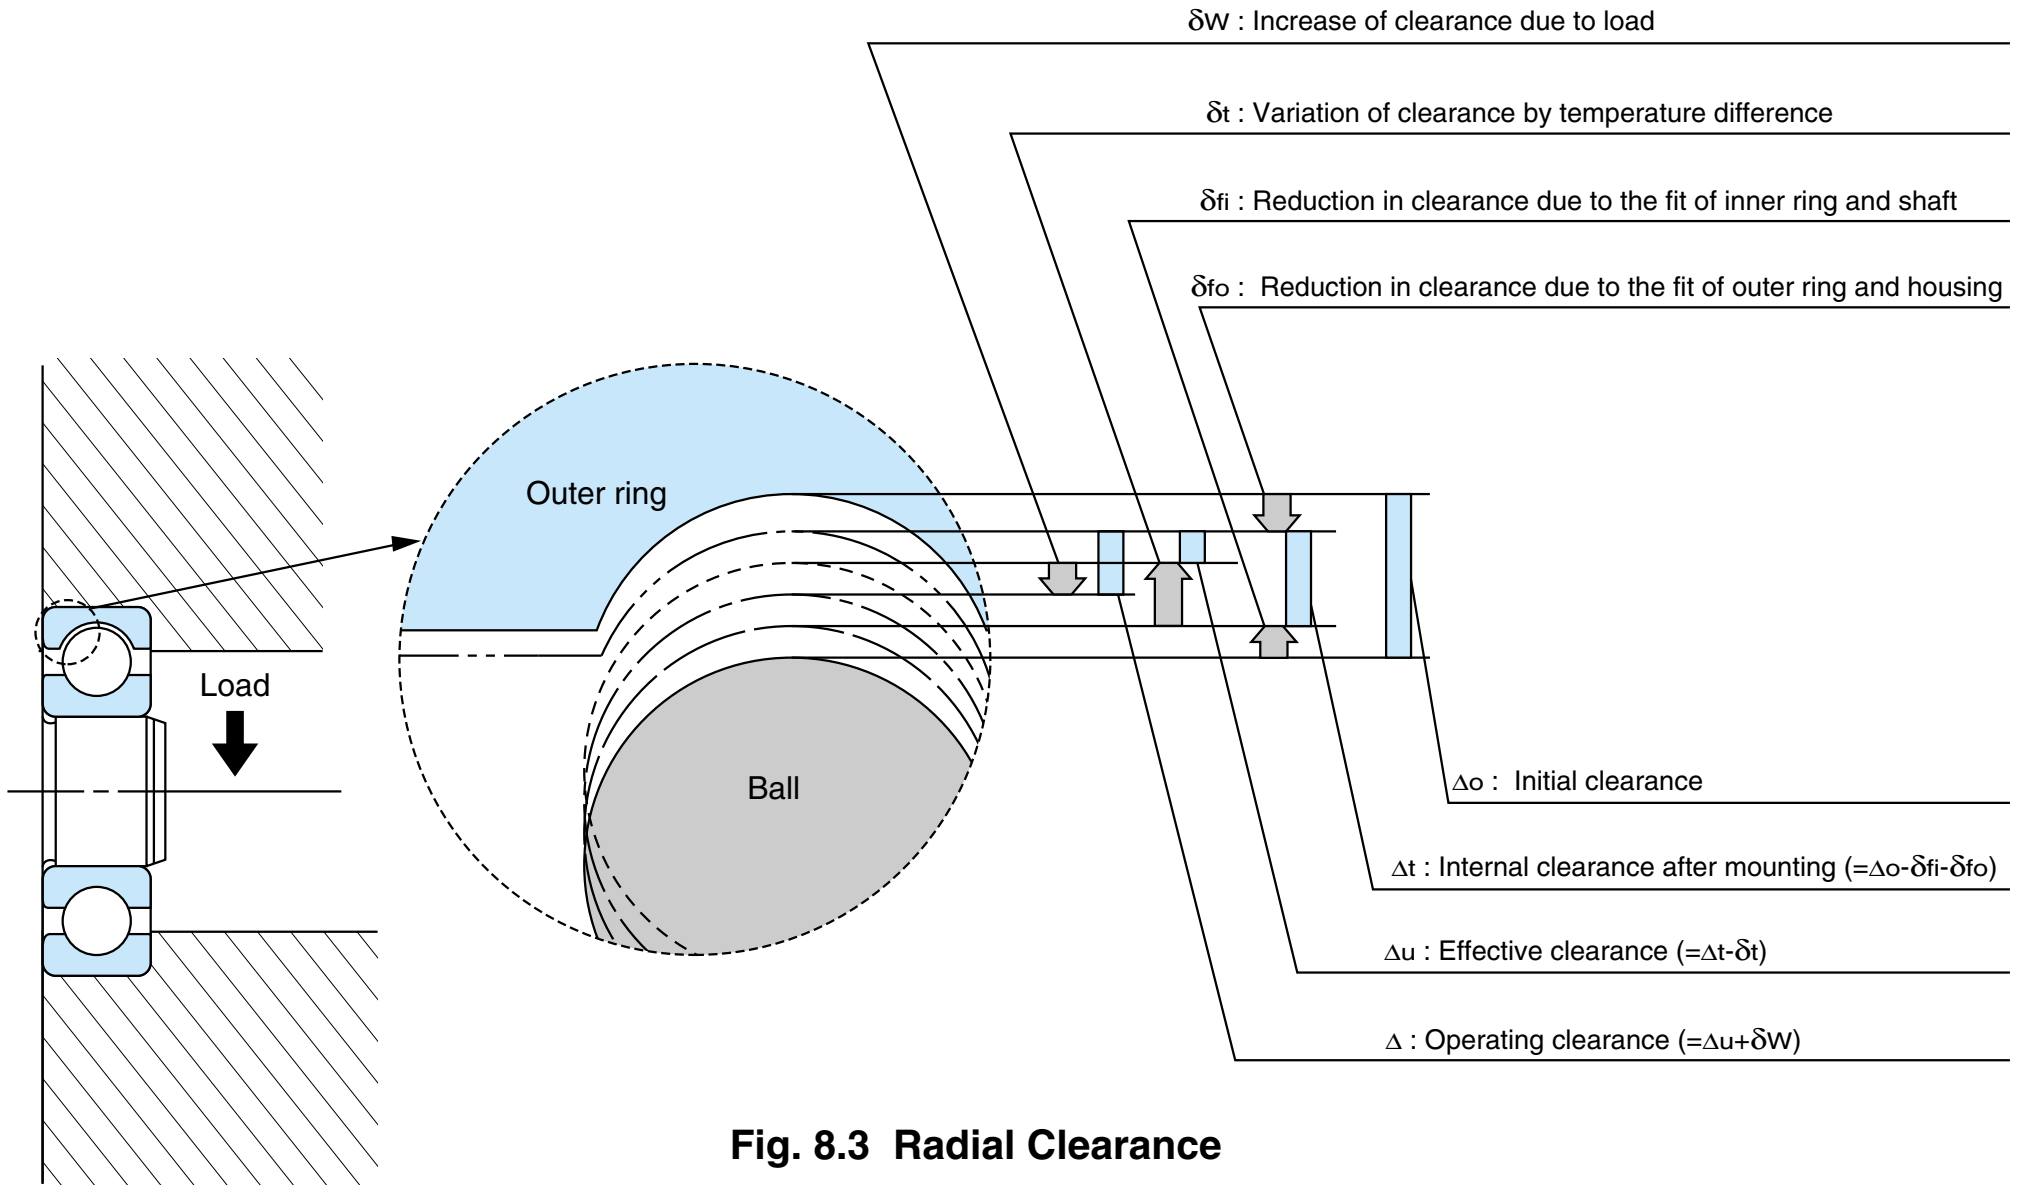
illustrates radial clearance of a single-row Deep-groove ball bearing.
